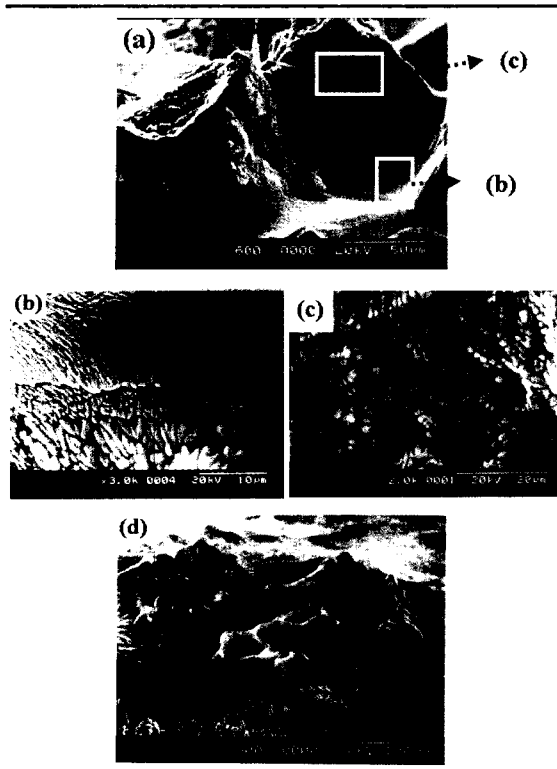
Solidification cracking observed on the fracture surface in the transverse-weld tensile specimens of 6061 aluminum alloy laser welds.
